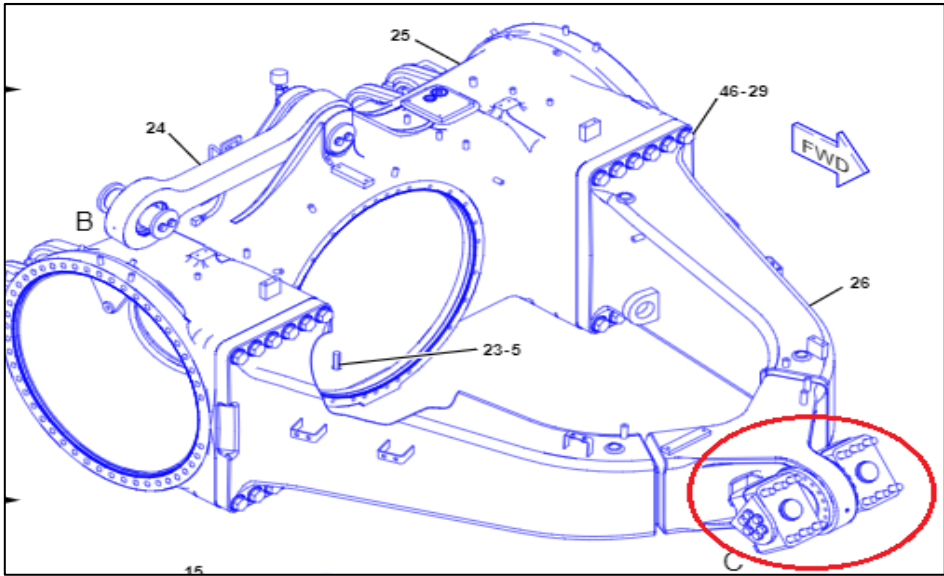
& 03 – Detail of hoist system hose 146-6174 that needs to be removed to adjust the A-frame pin clearance.
